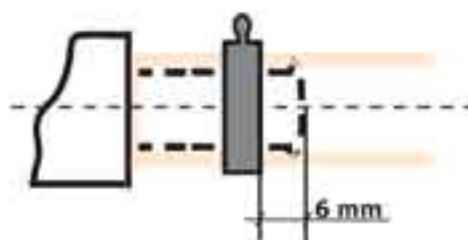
shows the assembly position of the clamp on the plastic connector of the multi-way valve.
